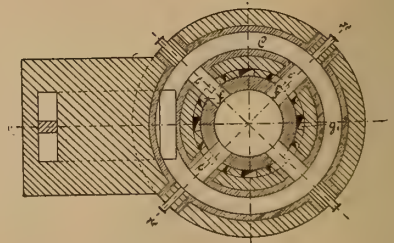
HORIZONTAL SECTION ON Y-Y
